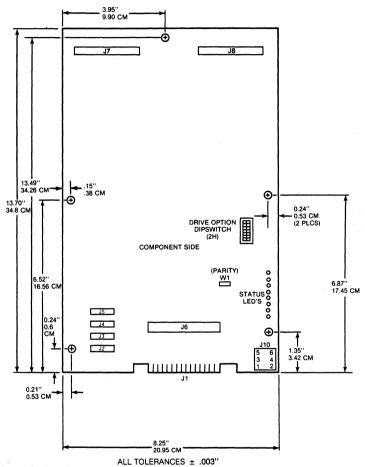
SA1403D DIMENSIONAL DRAWING
